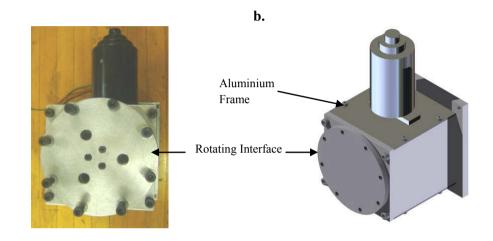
The Cutting Head Rotary Module (A-axis)
